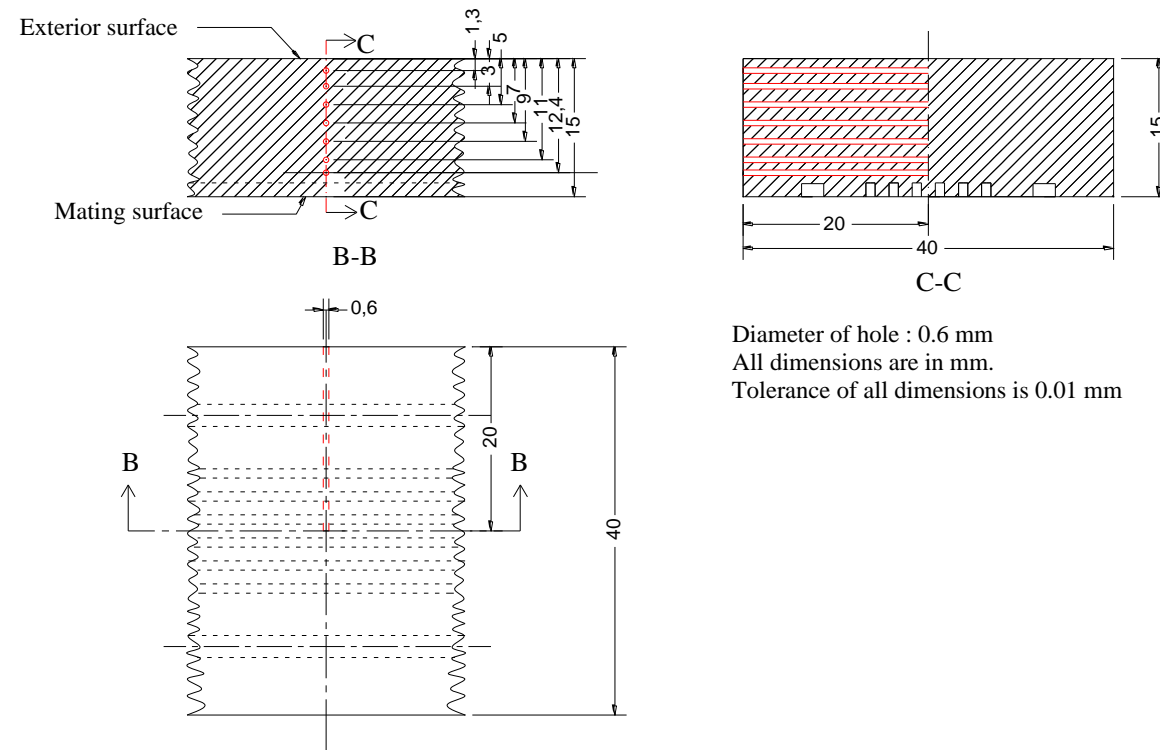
Drawing B-1: Details of thermocouple holes in Part B
